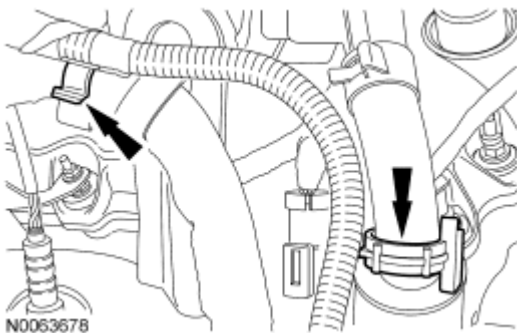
Identifying Block Heater Wiring Harness From Engine
